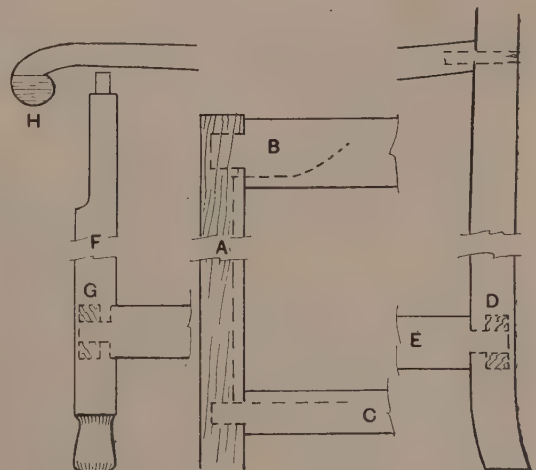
DETAIL OF LEGS AND JOINTS.
